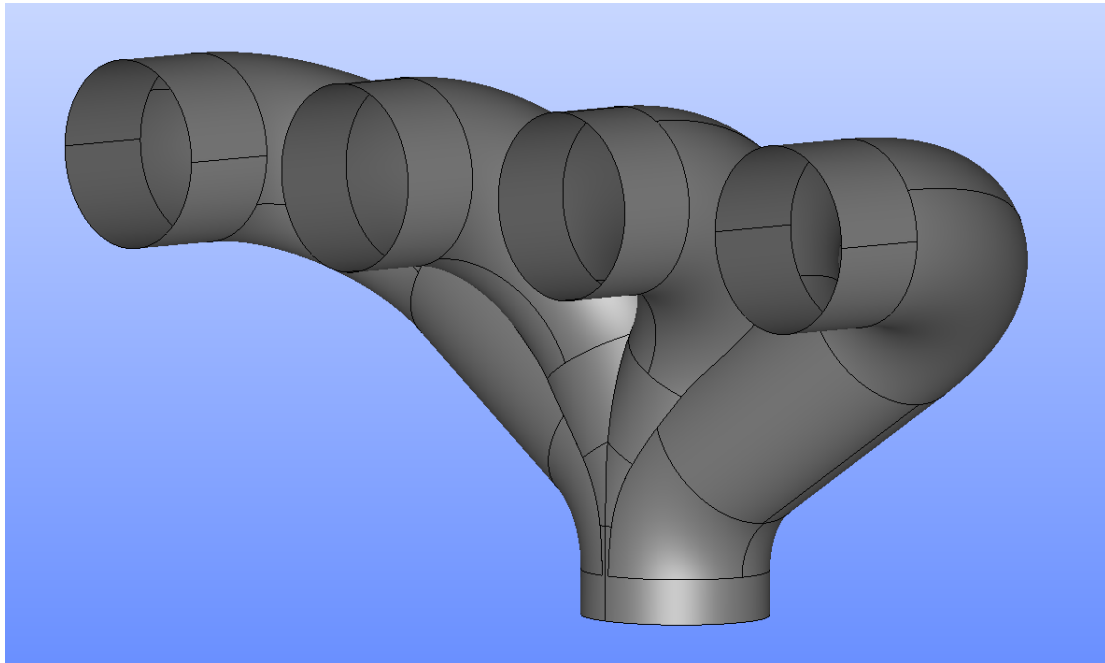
The CAD model of the intake manifold without the mounting flanges.
